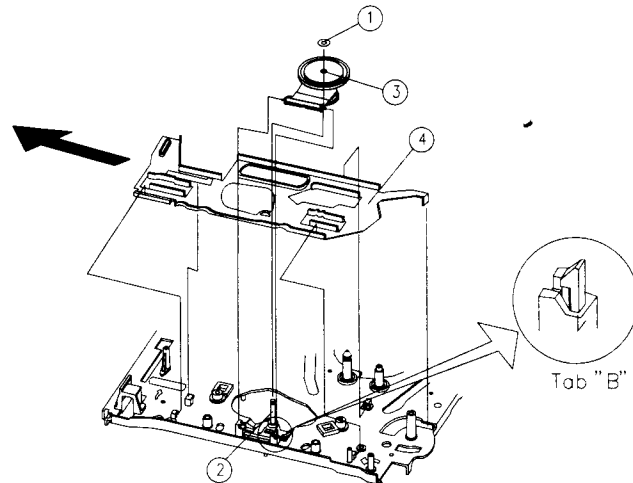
REEL GEAR TOTAL ASS'Y & CONNECT PLATE REMOVAL
